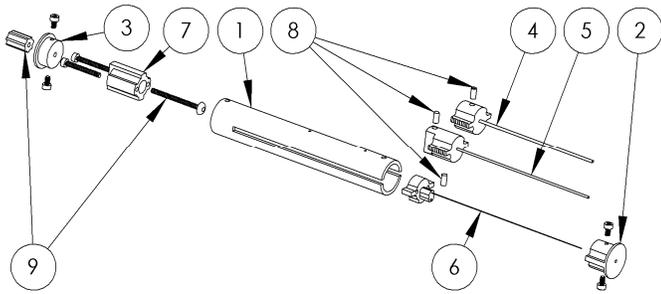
Exploded view of the insertion tool showing (1) the housing, (2) the front plug, (3) the back plug, (4) the guide tube and its slider, (5) the push tube and its slider, (6) the stylet and half of its slider, (7) the other half of the stylet slider that fixes its forward travel, (8) ball nose spring plungers that snap into various detents on the interior of the housing and (9) the adjustment screw.
